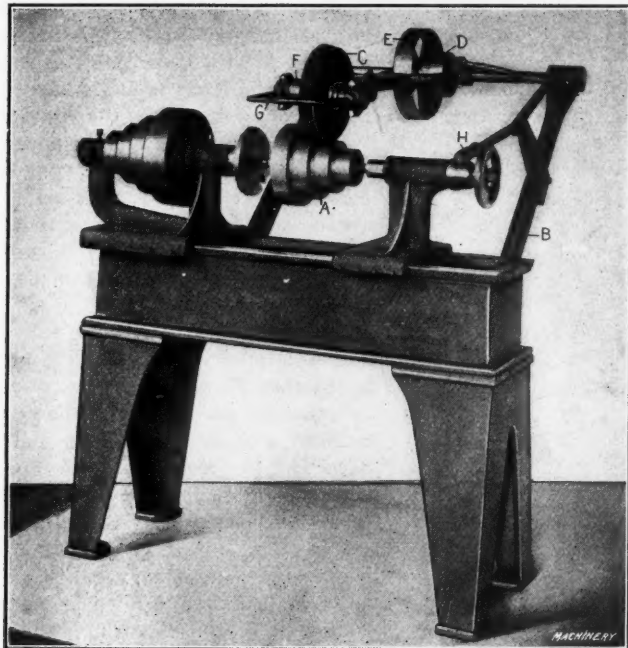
Grinding External Diameter of Cone Pulleys in Special Machine built for that Purpose
